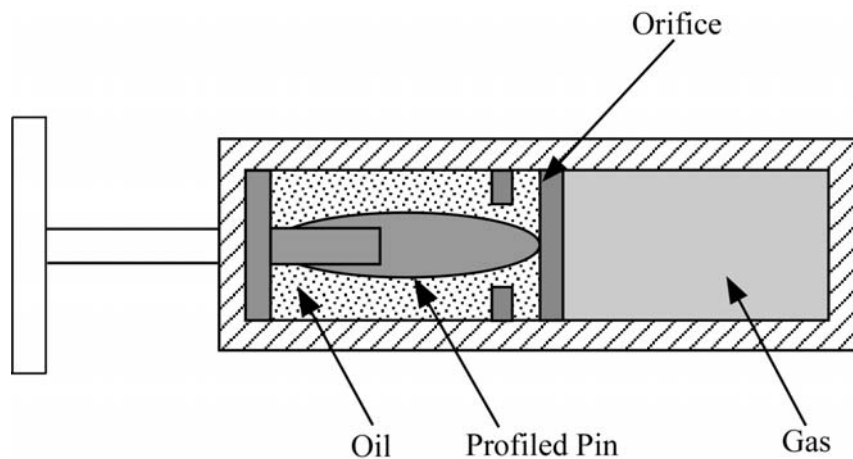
Schematic of Hydraulic/Gas damper.
